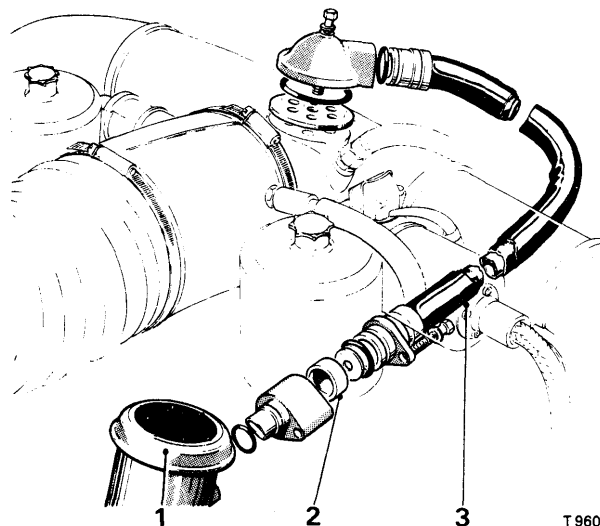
EXPLODED VIEW OF CRANKCASE BREATHER PIPE
